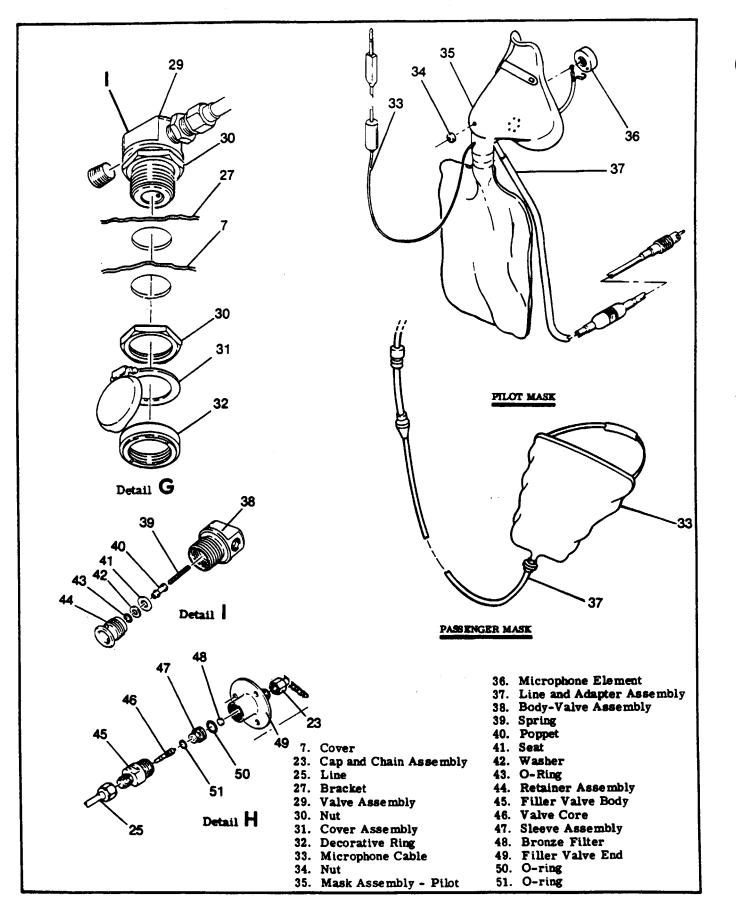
Oxygen Installation (Sheet 3 of 3)
